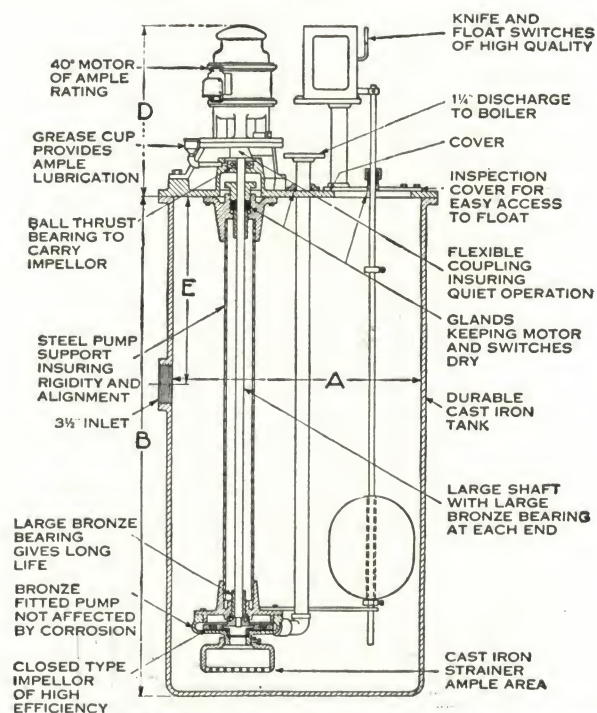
Sectional Drawing, Vertical Type Condensation Pump
